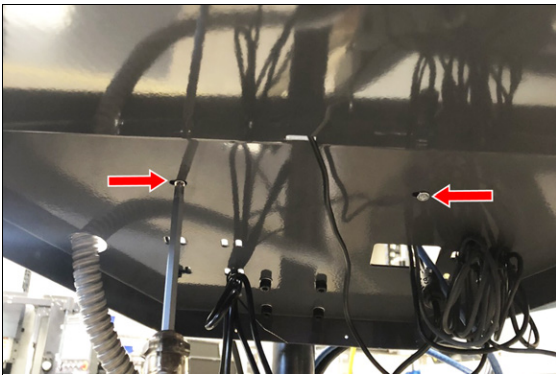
Attaching the keyboard tray to the operator console (from below).
